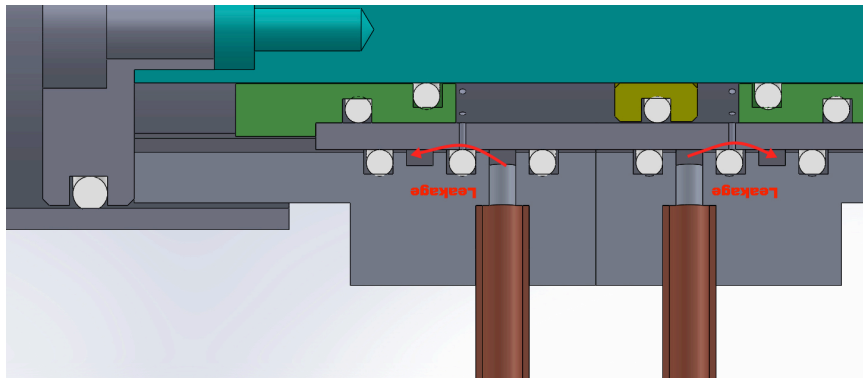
The drawing shows an axial cut of the second prototype. The red arrows represent the flow bypassing the O-rings while on top of the inlet/outlet holes of the expander.
